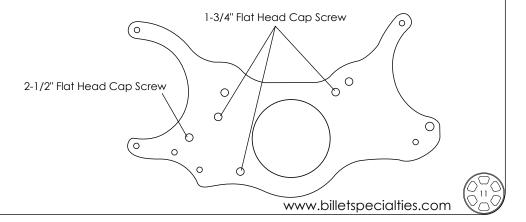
Install Tensioner Bracket Assembly & Bridge Bracket
